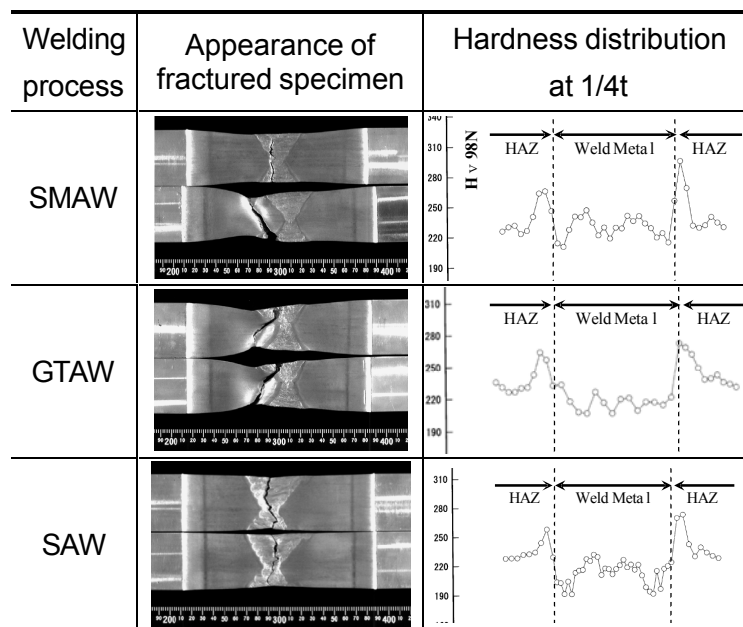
Appearance of fractured specimen of tensile test of welded joints and Vickers hardness distributions (50mm)
